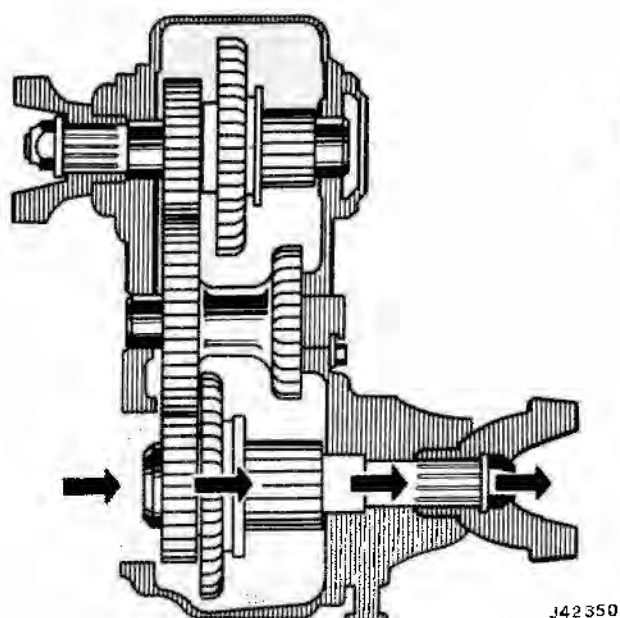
Silent Transfer Case in 4-Wheel Drive
